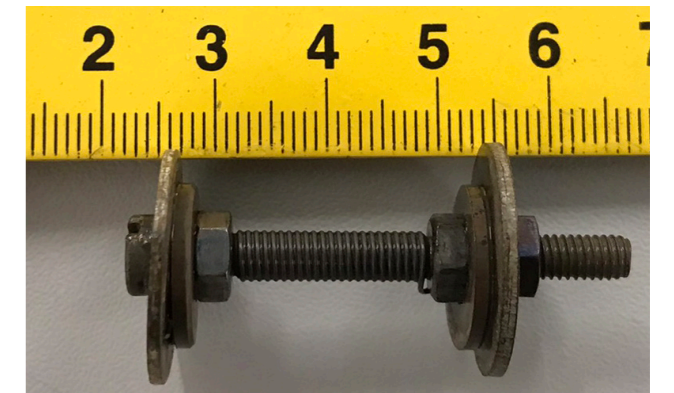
BOLT JIG METHOD USED TO FORM SMA WIRES INTO SPIRAL SPRINGS.
